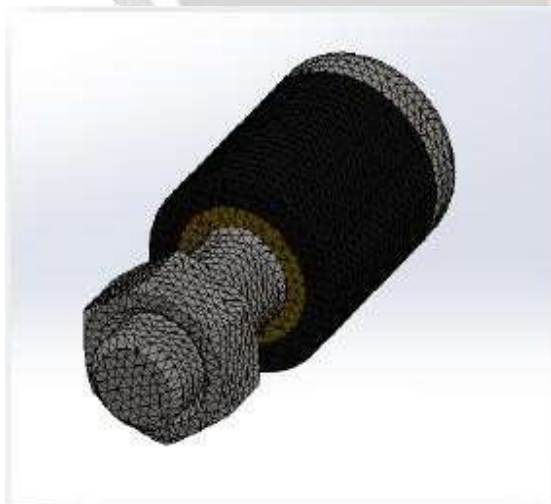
Meshing of Nut-Pin- Bushed assembly
